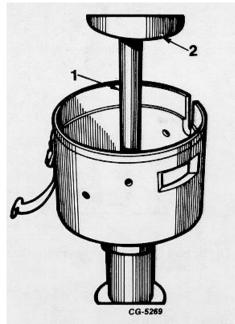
Pressing Out Lower Bushing Using Knock-Out Bar
